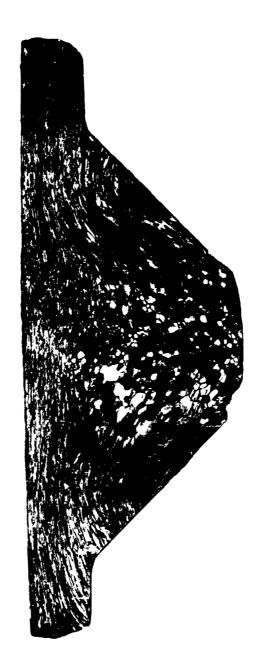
Macroetched section of blocked tungsten forging made from arc melted billet. Note crack on left side of forging. Cracks are both intra- and trans-granular in nature.
